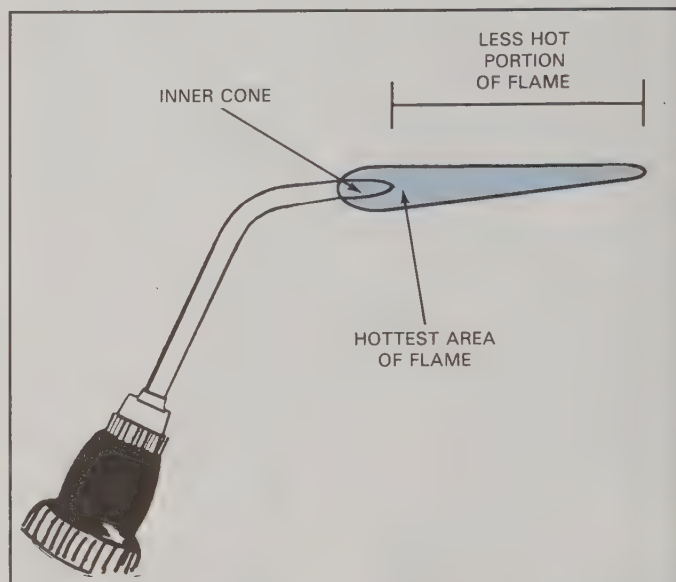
The flame can be adjusted with a knob on the handle. The hottest area of the flame is just in front of the inner cone's tip.
